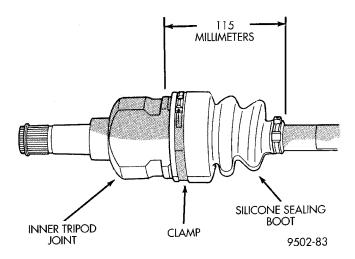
Sealing Boot End to End Length with Silicone Boot
